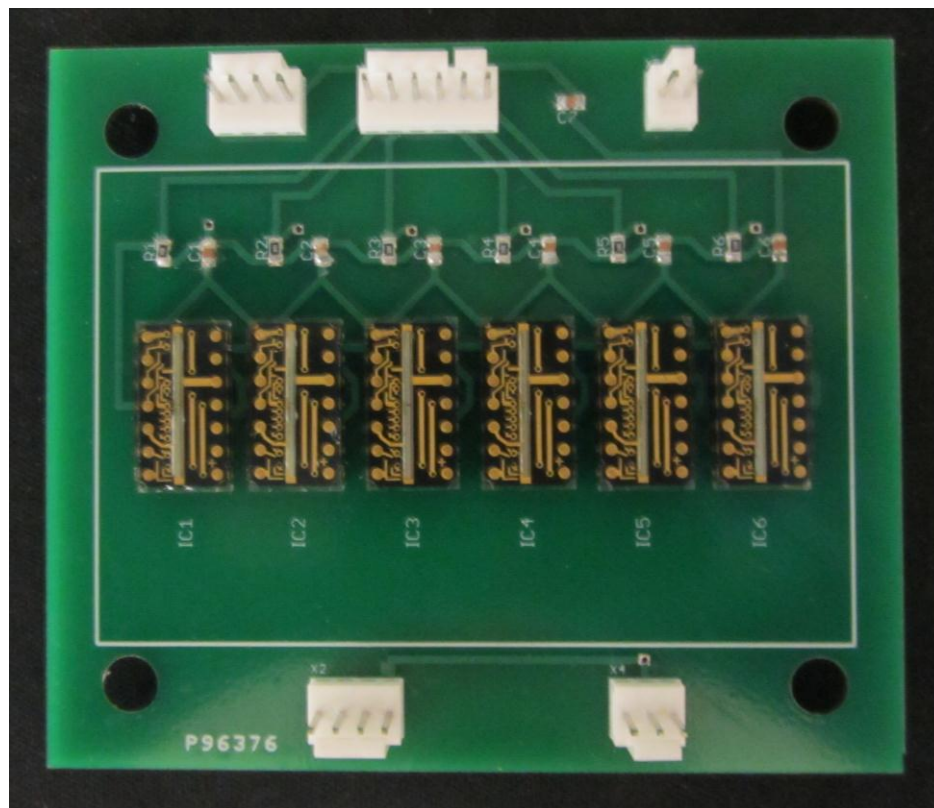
A fully assembled PCB featuring six CCD components in parallel to enable six parallel experiments on a single chip. Connector pins are visible in the white Molex connector housings.
